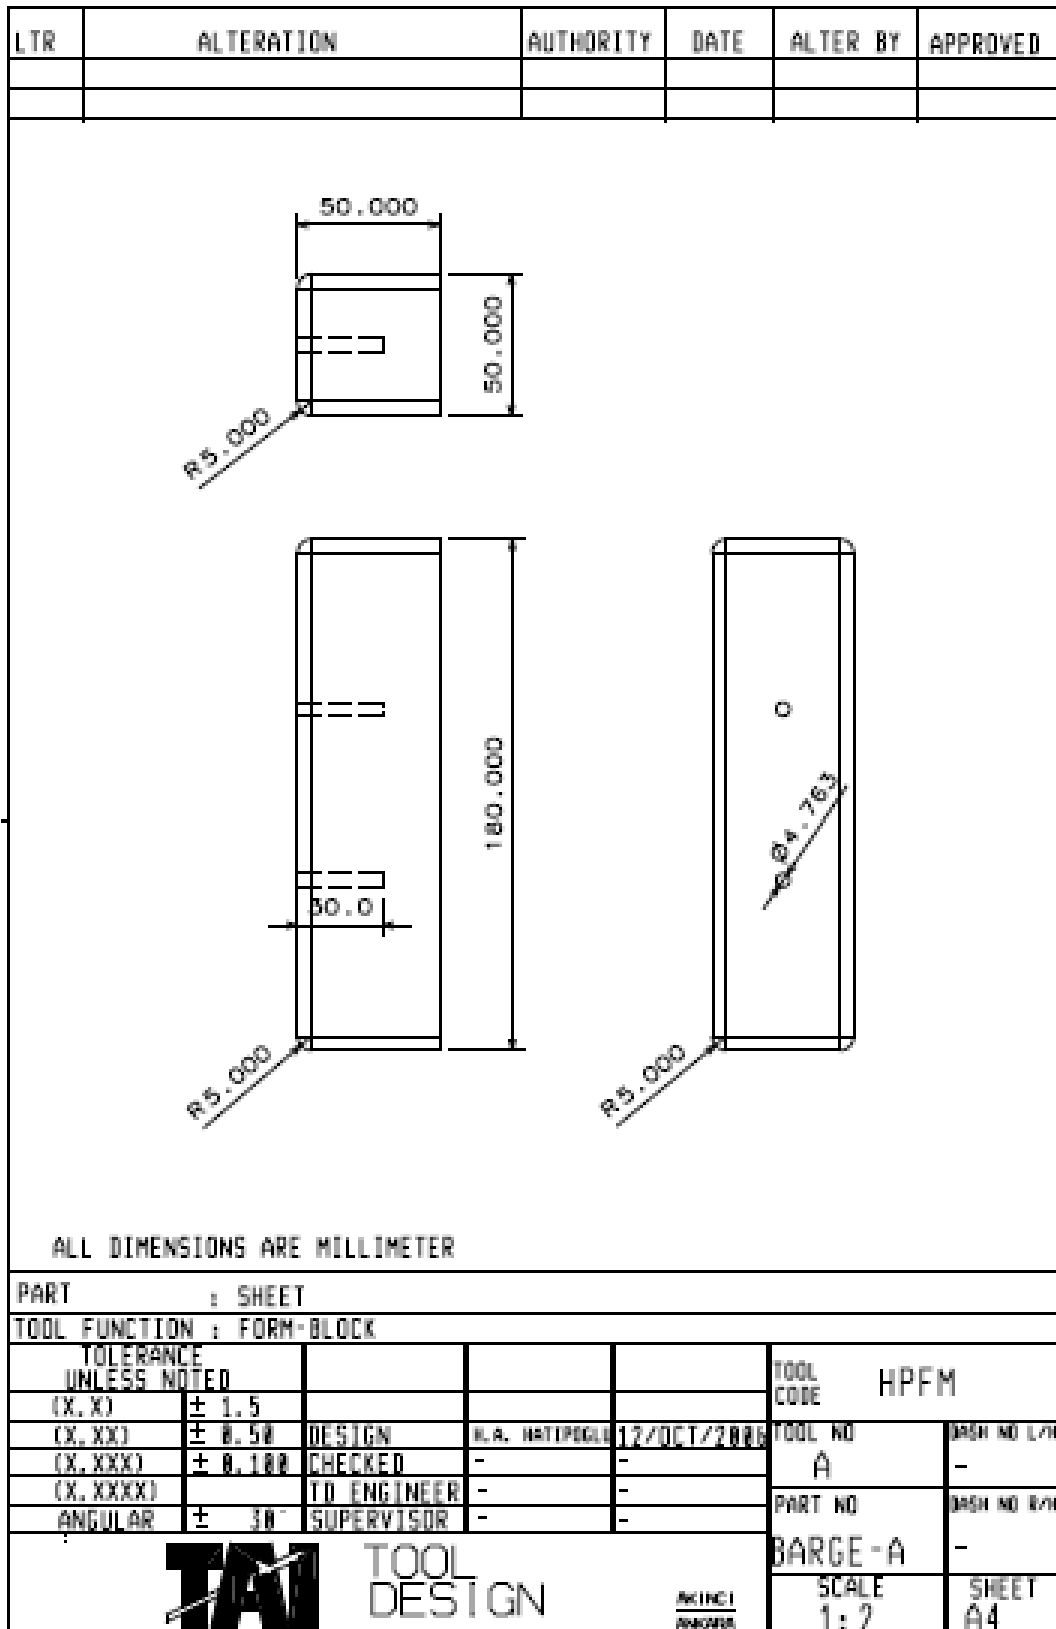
Technical drawing of the die used in the straight flanging experiment
